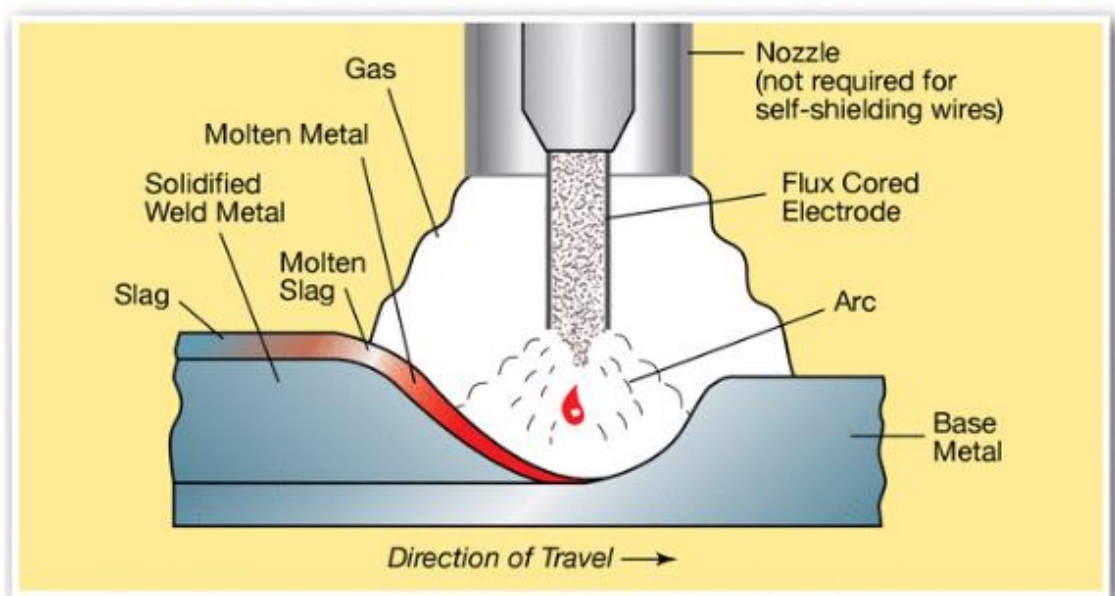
Process of Flux cored arc welding (Hobart Institute of Welding Technology 2002, p.1).
